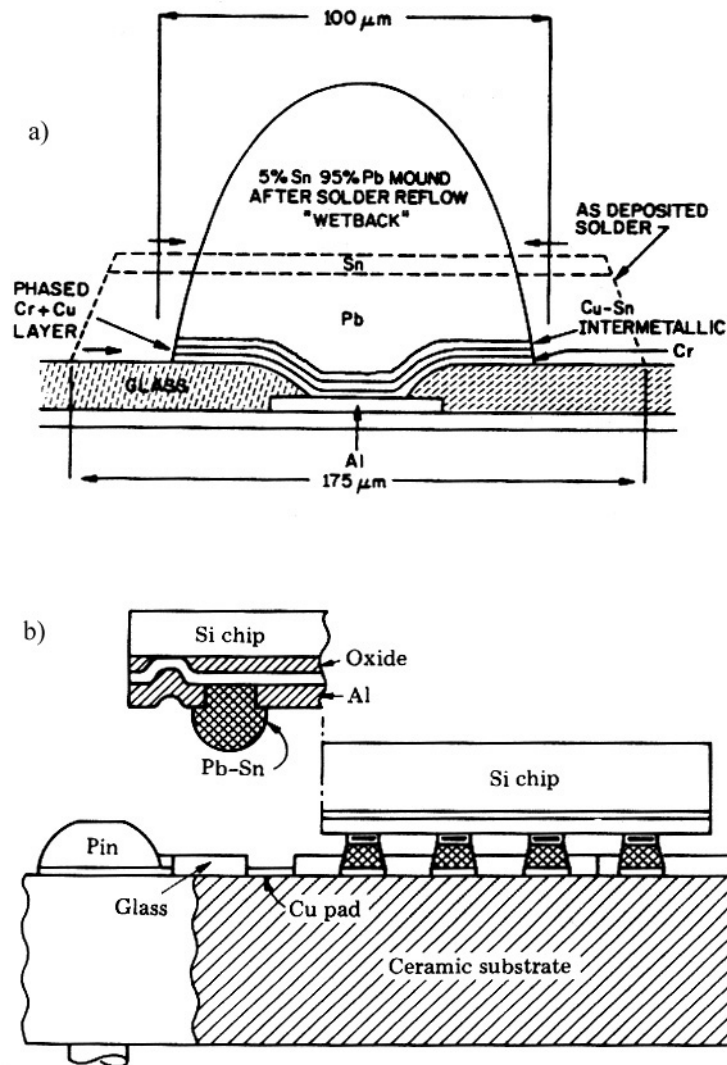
Flip chip soldering: a): The metals for the solder bump before reflow (dashed lines) and after reflow; b): Bump before the soldering of the chip onto the substrate and after soldering.
